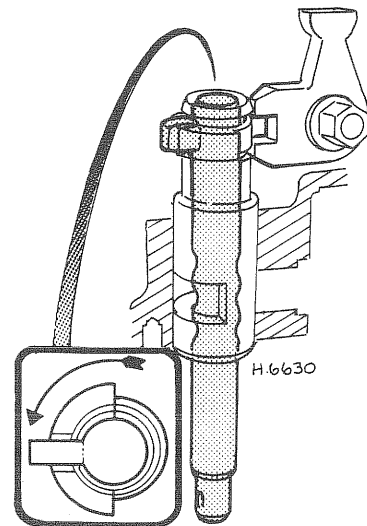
Selector shaft turned anti-clockwise to disengage bellcrank levers (Sec 4)
